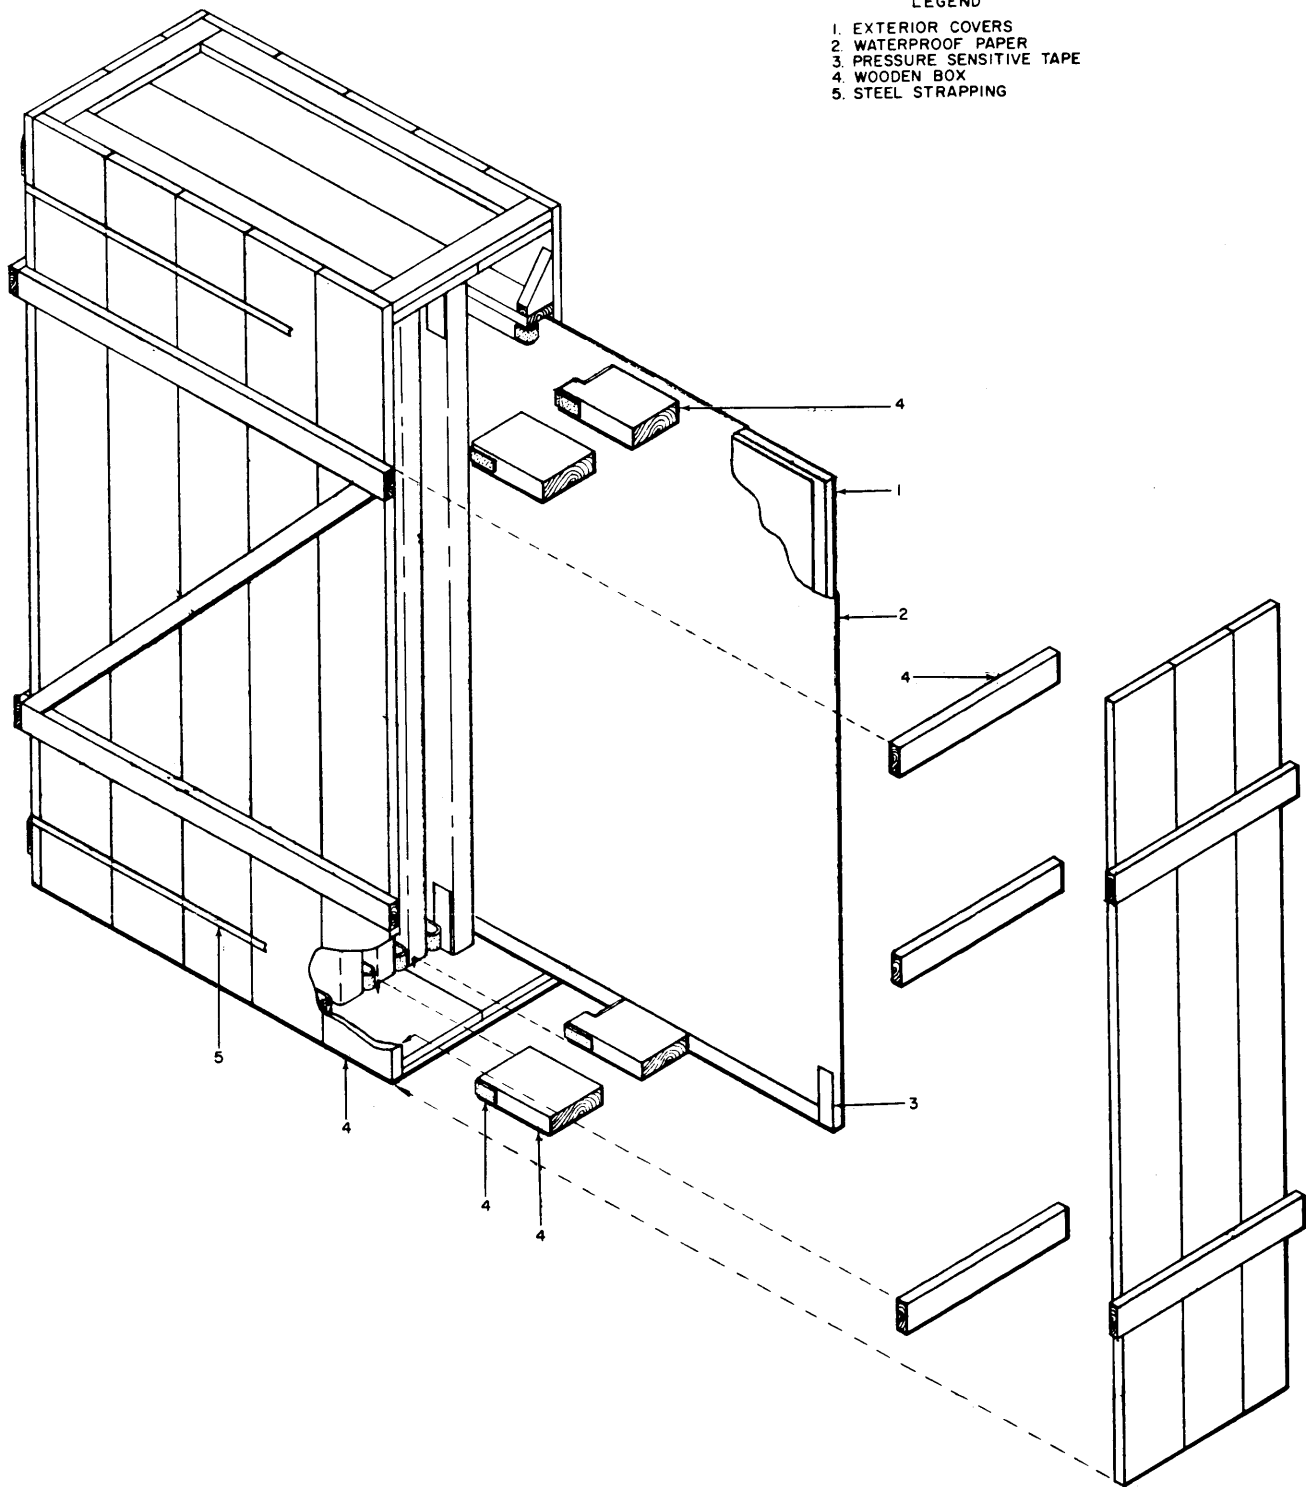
Typical Equipment Packaging (Sheet 3 of 3)
